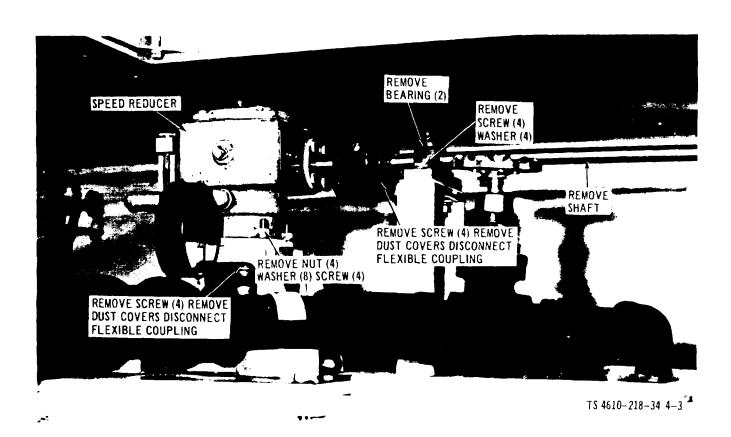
Erdlator Agitator Drive Shaft and Speed Reducer Assembly, Removal and Installation
